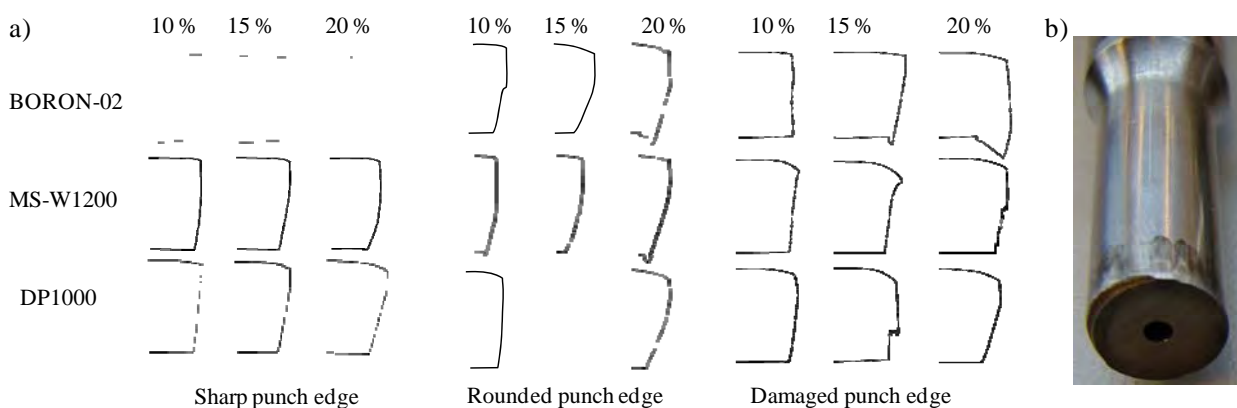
a) Comparison of sheet sheared edges obtained in punching BORON-02 1,8 mm thick, MS-W1200 and DP1000 2 mm thick, at clearances of 10, 15 and 20 % using sharp, rounded and damaged punch edges; b) damaged punch
